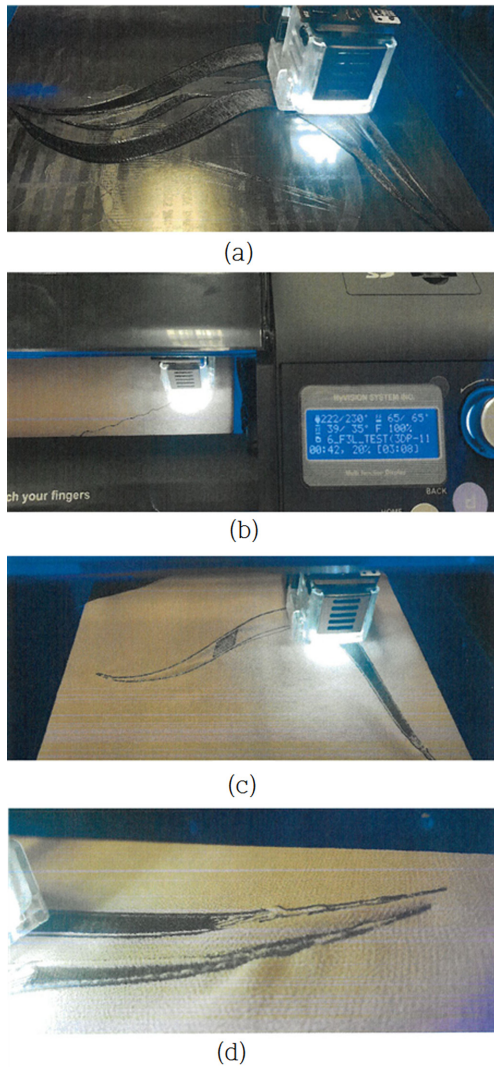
Sandwich type 3DP polymer-fabric printing process.
